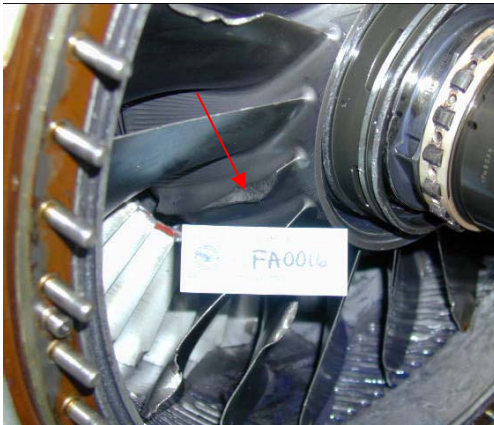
Fracture in compressor blade. Engine S/N FA0016.
